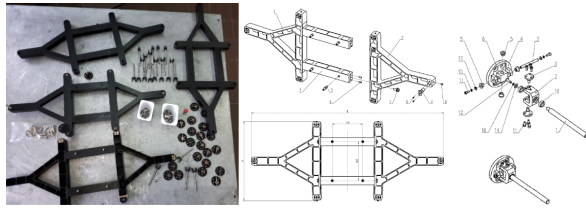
Four complete sets of small frames and mounts (left). Design drawing of a small frame and mounts (right).
